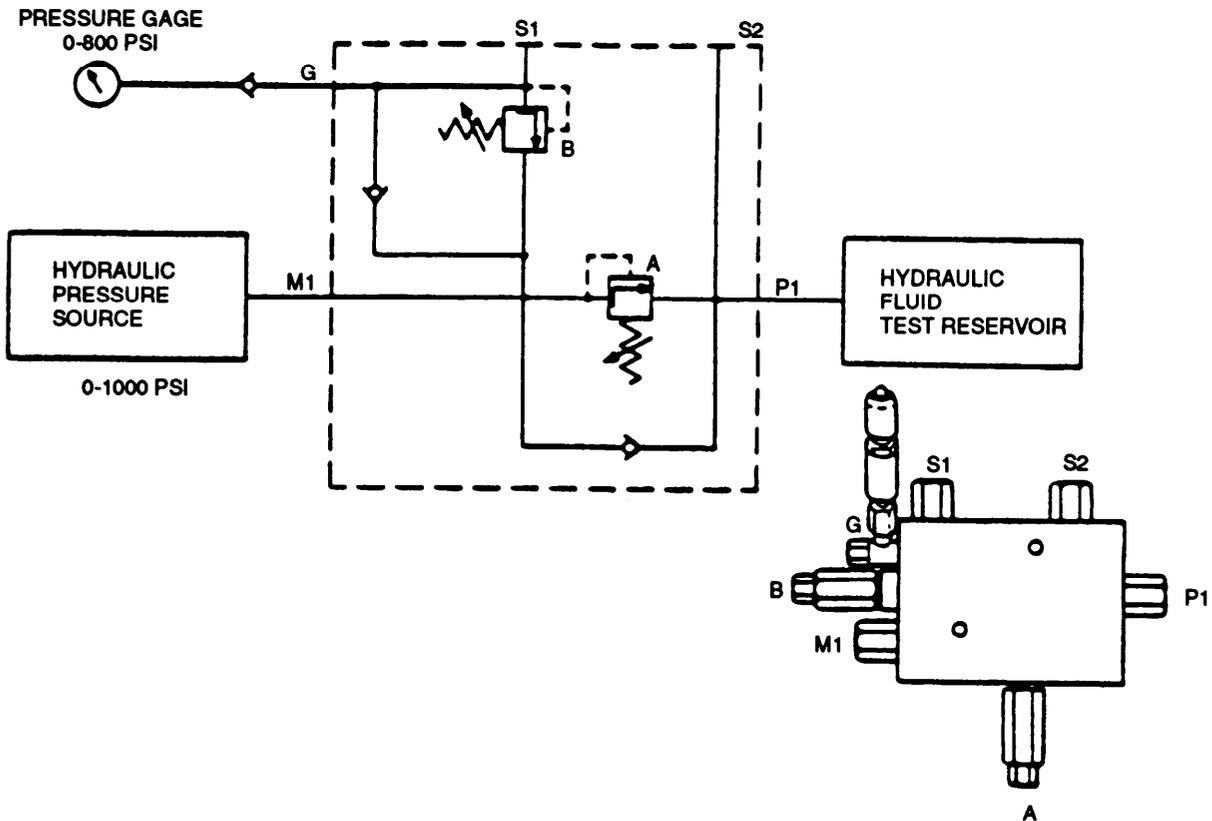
Cable Tensioner Valve Valve A, Adjust.
